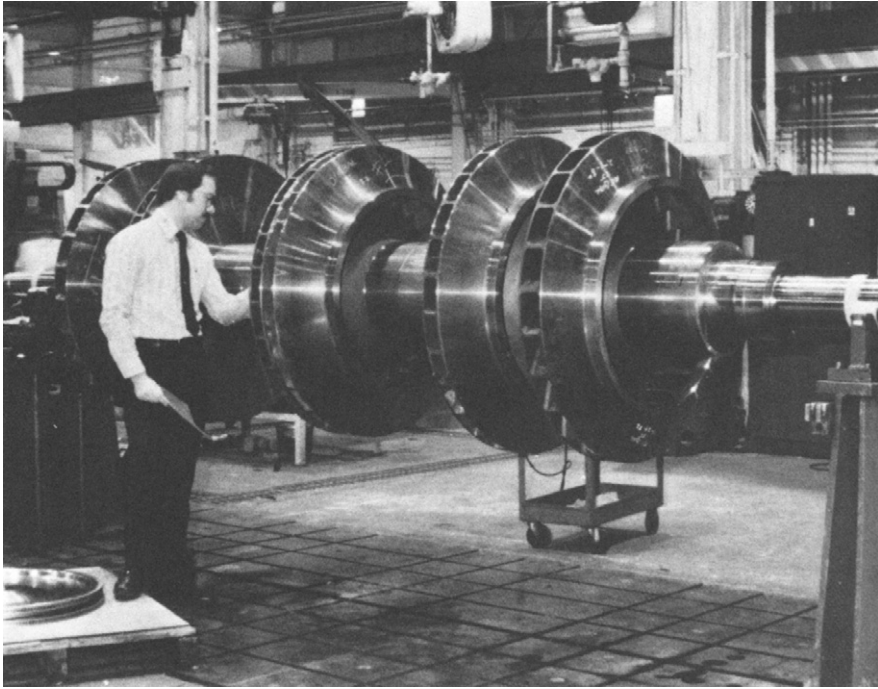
Closed impeller (courtesy Elliott Company, Jeannette, PA).
